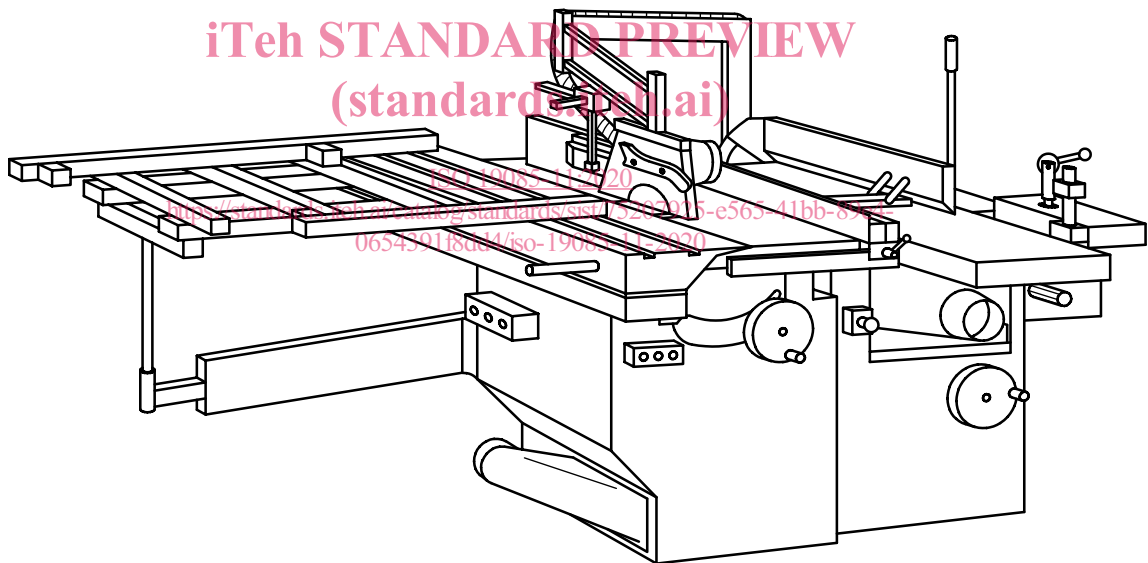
Example of a machine with dimension saw, moulding and planing units, with a mortising device
